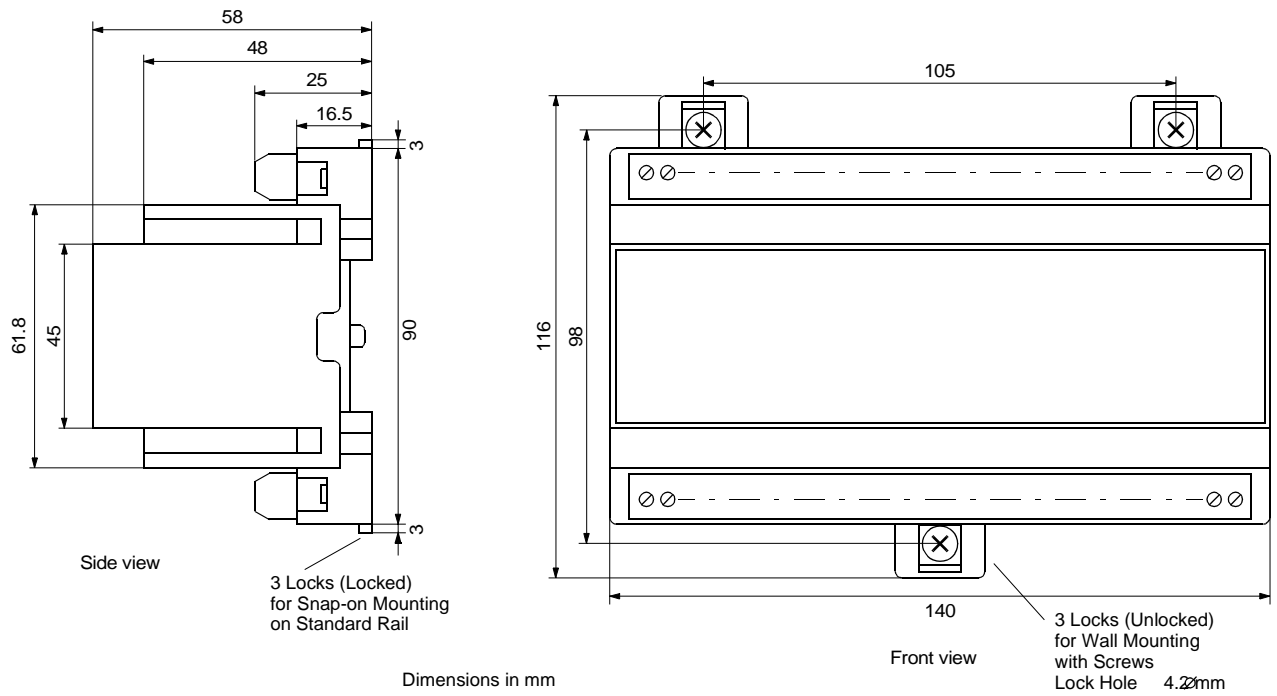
Dimensions RTD-box 7XV5662-*AD10-0000
